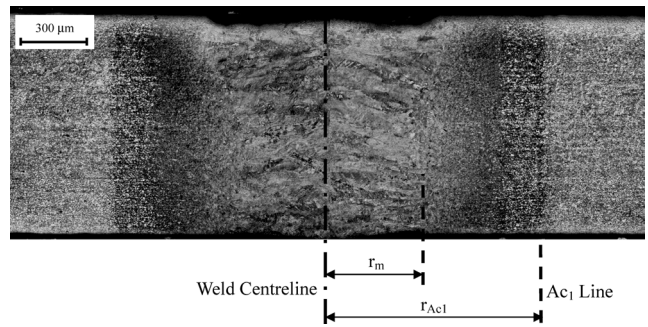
Cross section of a DP600S diode laser weld with speed of 1.4 m/min.
